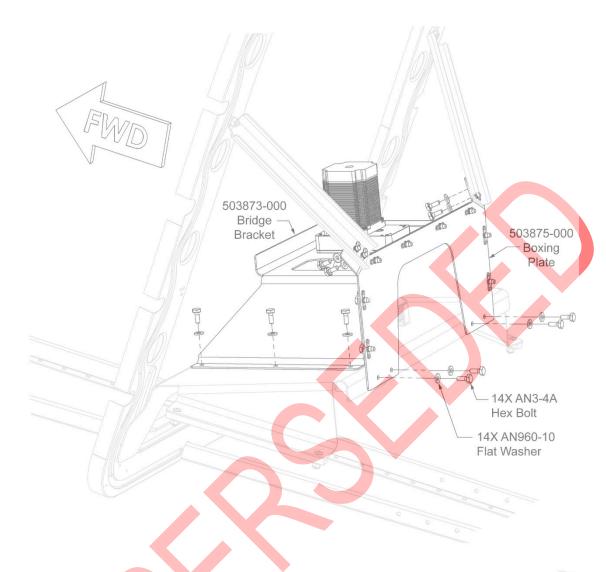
Removing Bridge Bracket and Boxing Plate Assembly from Aircraft
